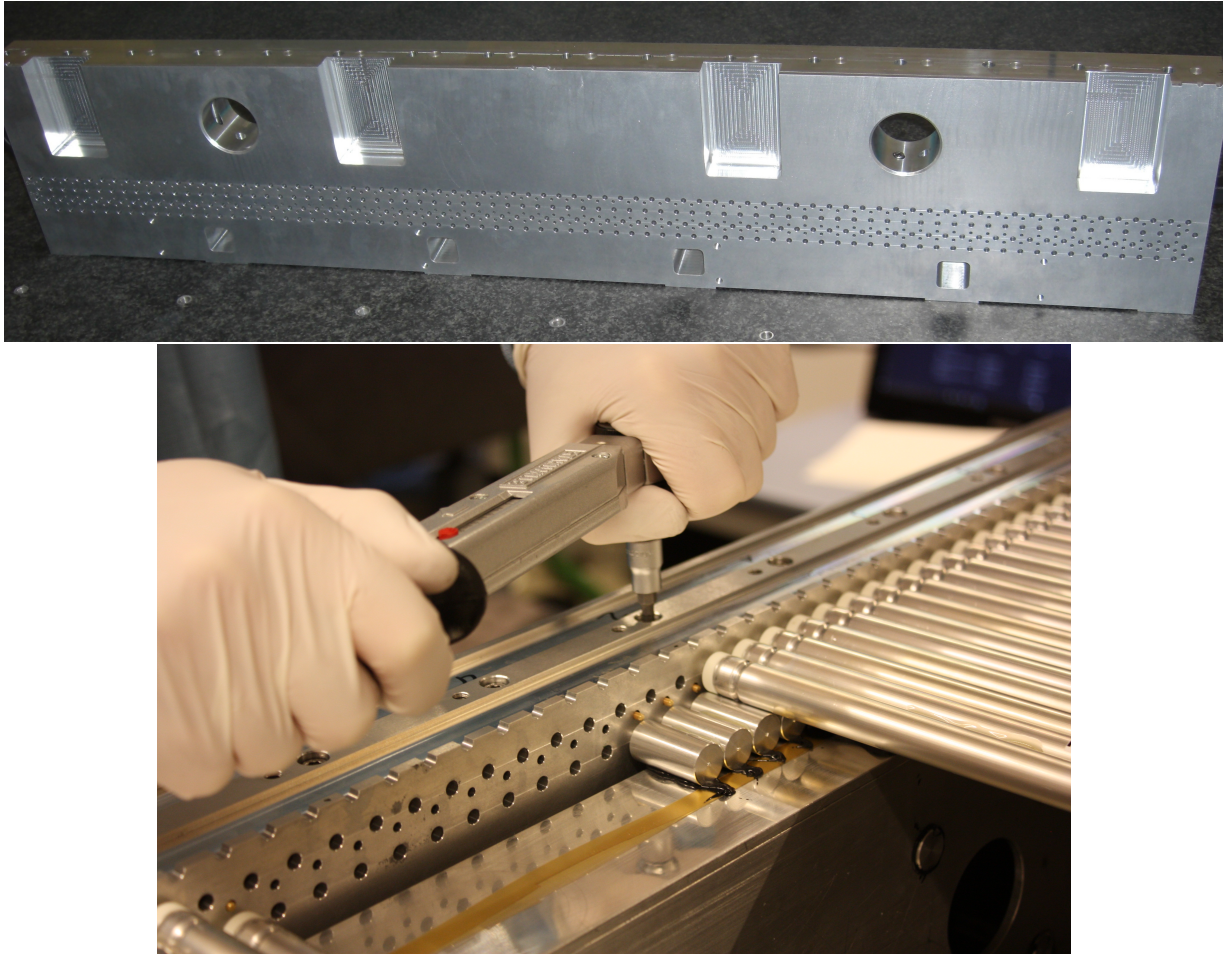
Alignment comb (top) used to align the tubes in each layer. The larger holes align the tubes, while the smaller holes guide the grounding contacts. Alignment comb in use with tubes installed (bottom).
